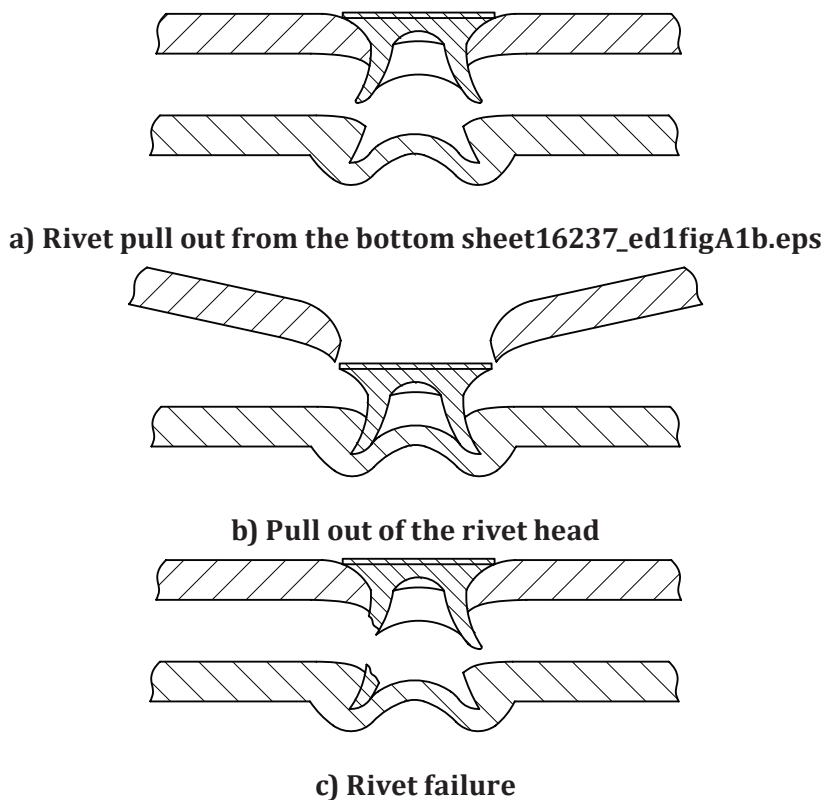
Typical failure modes of semi-tubular self-piercing rivet joints under cross-tension load
